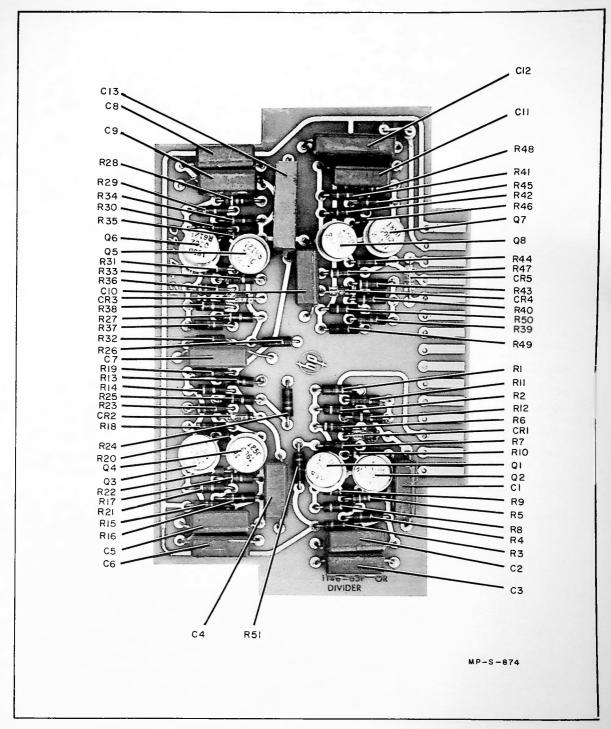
Divider Assembly A3, A4, A5, Component Location
